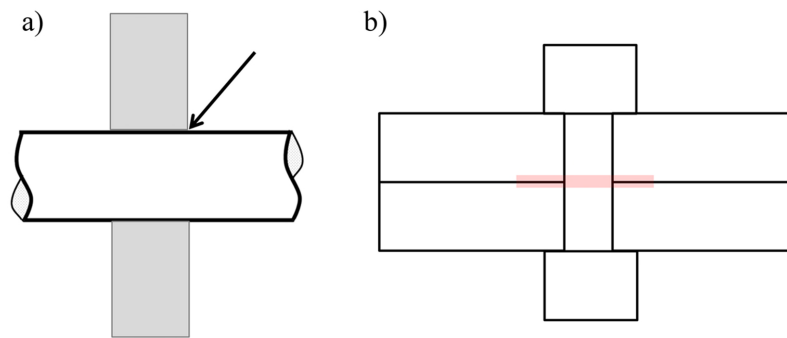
Common examples of fretting fatigue locations, in shaft-hub (a) and bolted (b) connections.
